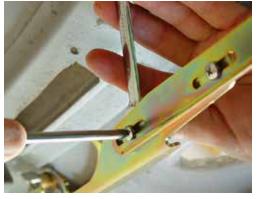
When the Pivot Shaft is in the parked position, there should be between a 1/4" to 3/16" gap between the flat in the Cross Link end and the stop tab on the Pivot Shaft.
